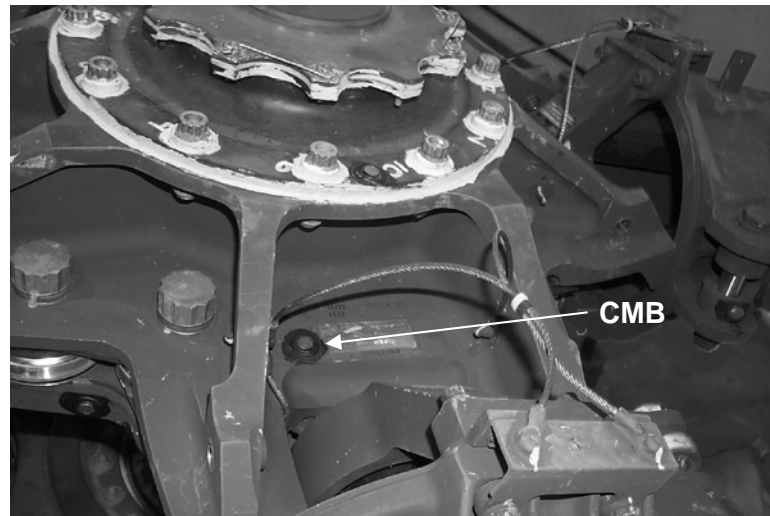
Main Rotor Head Assembly (AH-64A/D) with CMB Installed
